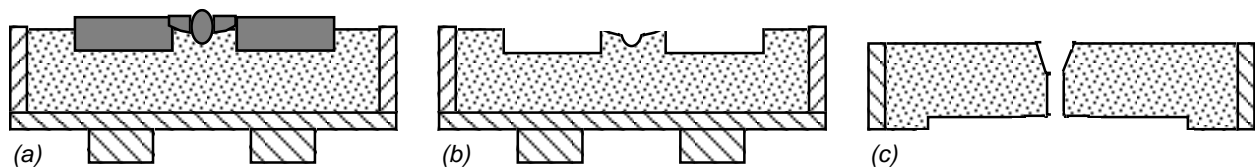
(a) The pattern tree in its match mold with half of the flask installed and (b) after sand was added and rammed, and a bottom board placed on top. (c) The flask after being rolled over.
